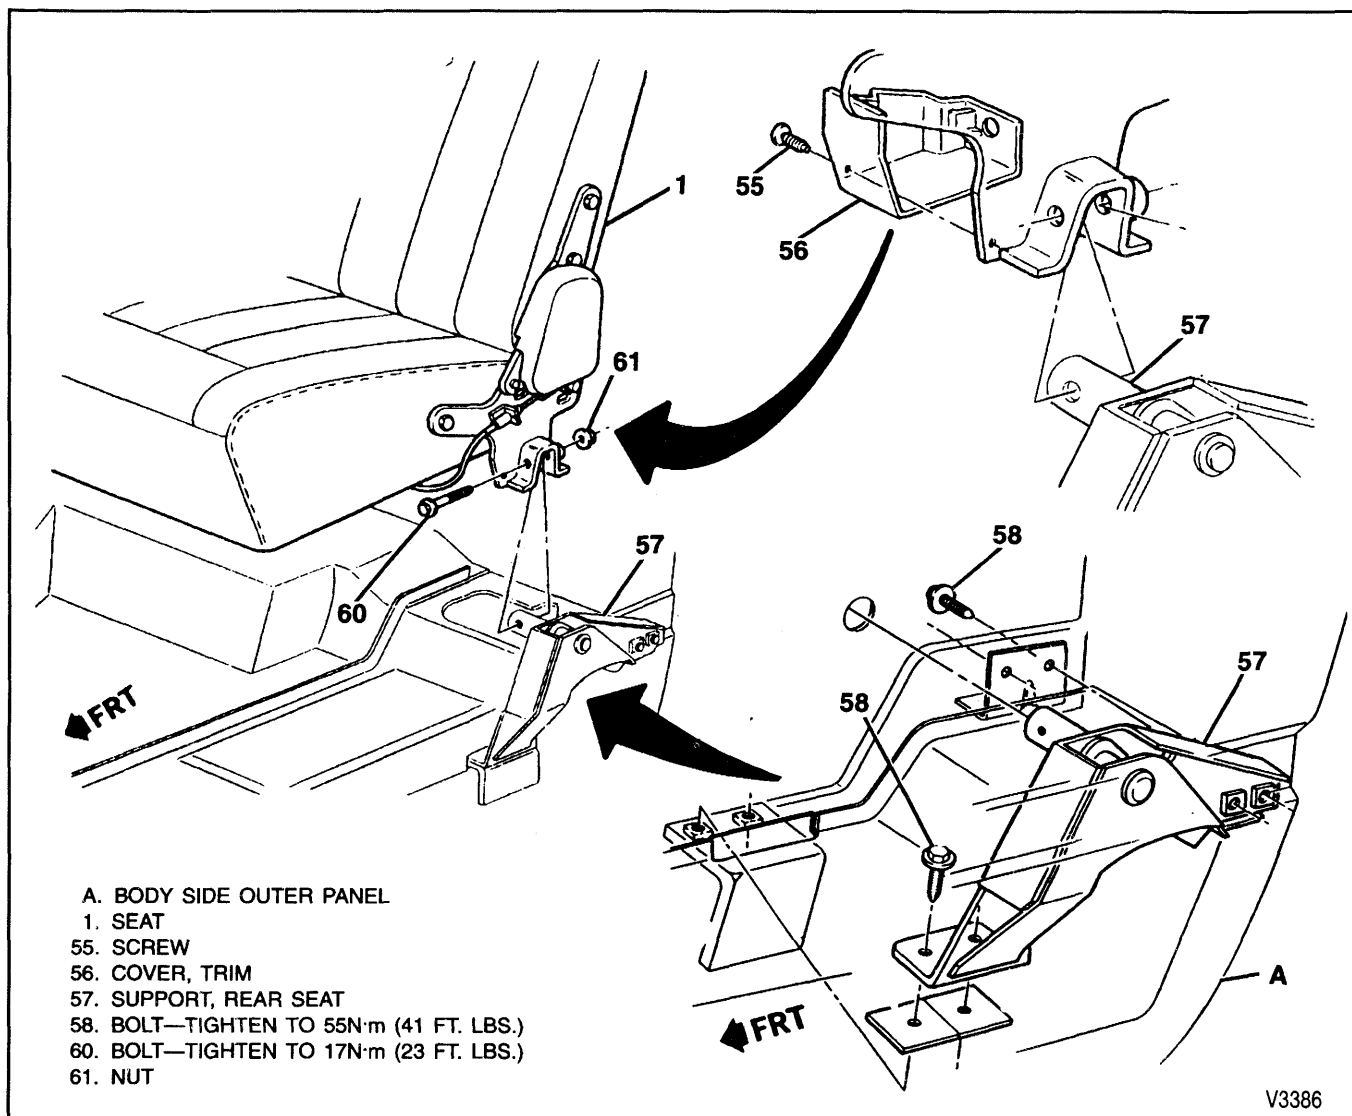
Rear Folding Seat Mounting (Extended Cab)
